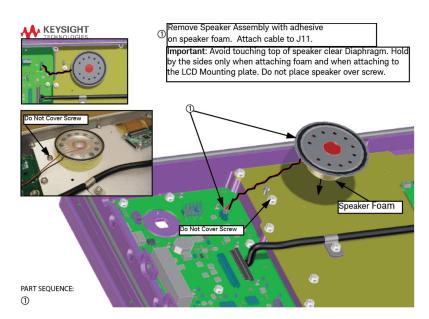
Remove Speaker Assembly and Mounting Foam
